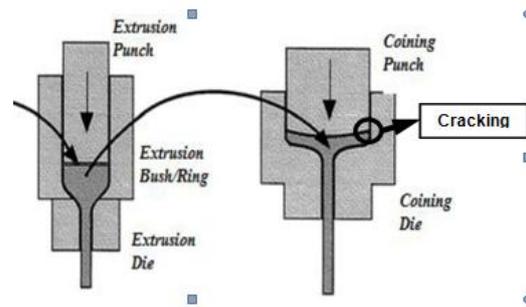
Extrusion of a preform (left) and coining of the valve head (right) in forging engine valves
